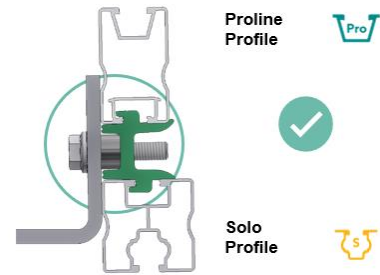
A: Multi Adaptor fixing rail to fastener
